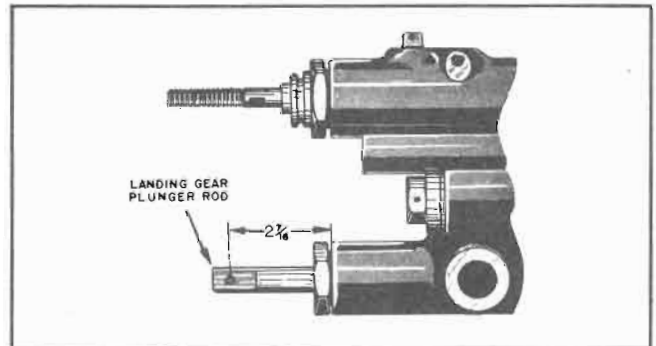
Selector Valve Landing Gear Plunger Rod Position
